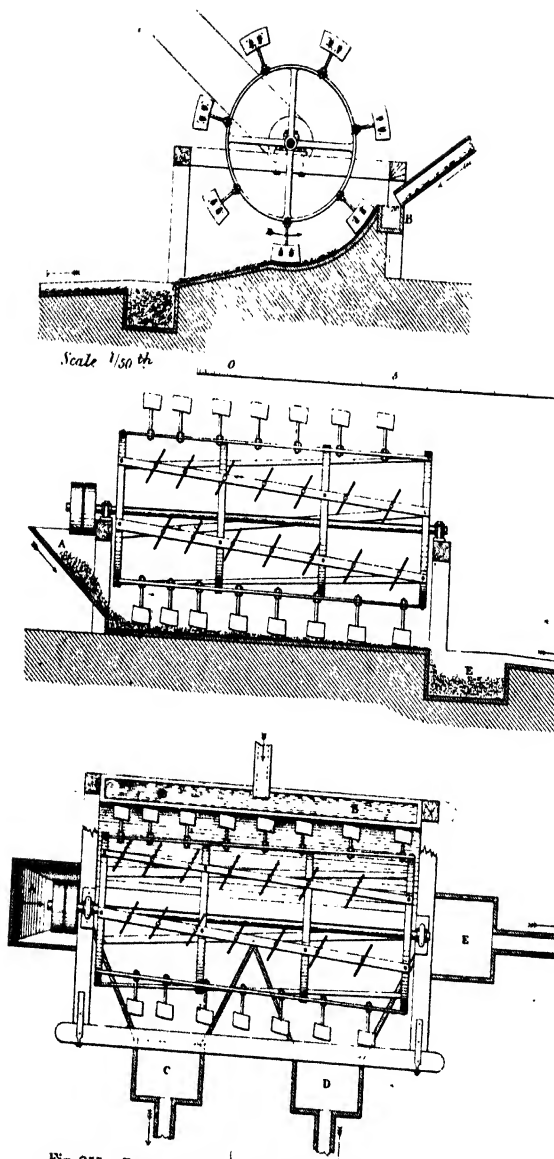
Propeller knife buddle. Plan, vertical and cross section.
